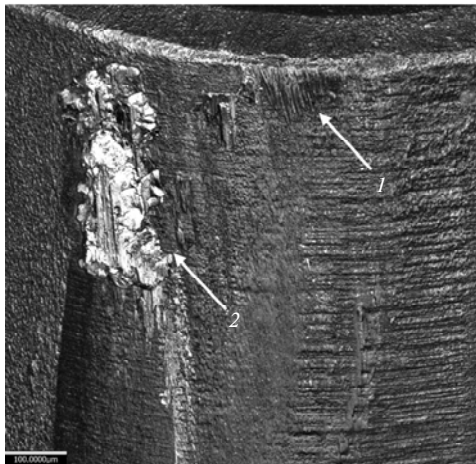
Condition of cBN 7025 machining blade after turning at a feed rate of 0.3 mm/rev: 1 – abrasion; 2 – peak-up.
